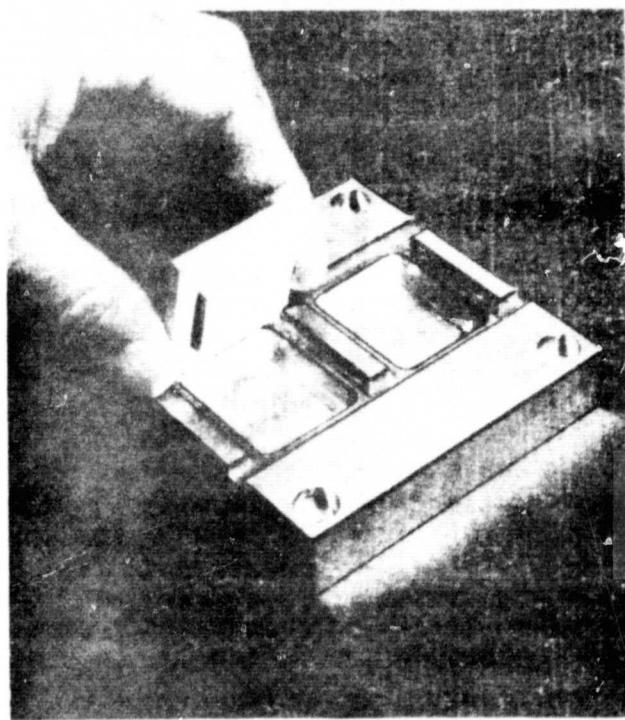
Shock Test Fixture and Specimen to be Tested.
